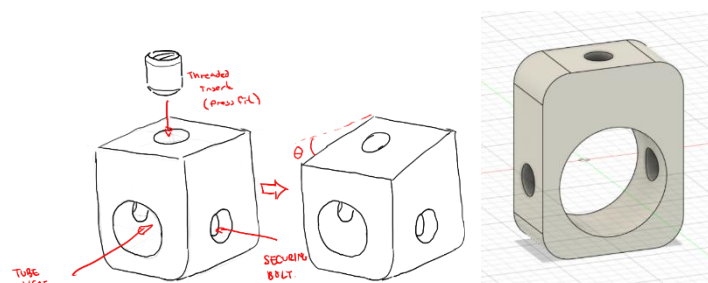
Sketch and CAD model of the 3D-printed panel mounting system.
